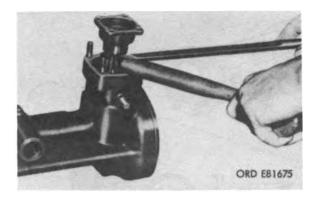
Using suitable tools to remove bearing retainer and drive pinion.
